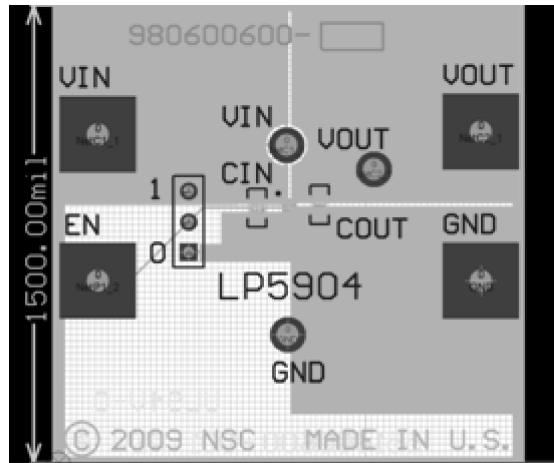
Pin Layout Board Size:- 21 mm x 21 mm
